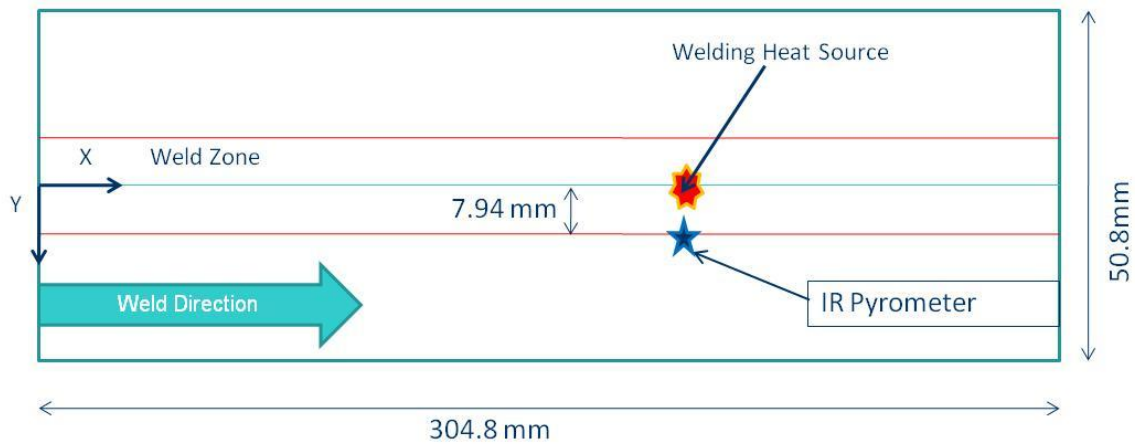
Top view of twelve inch weld specimen showing pyrometer placement
